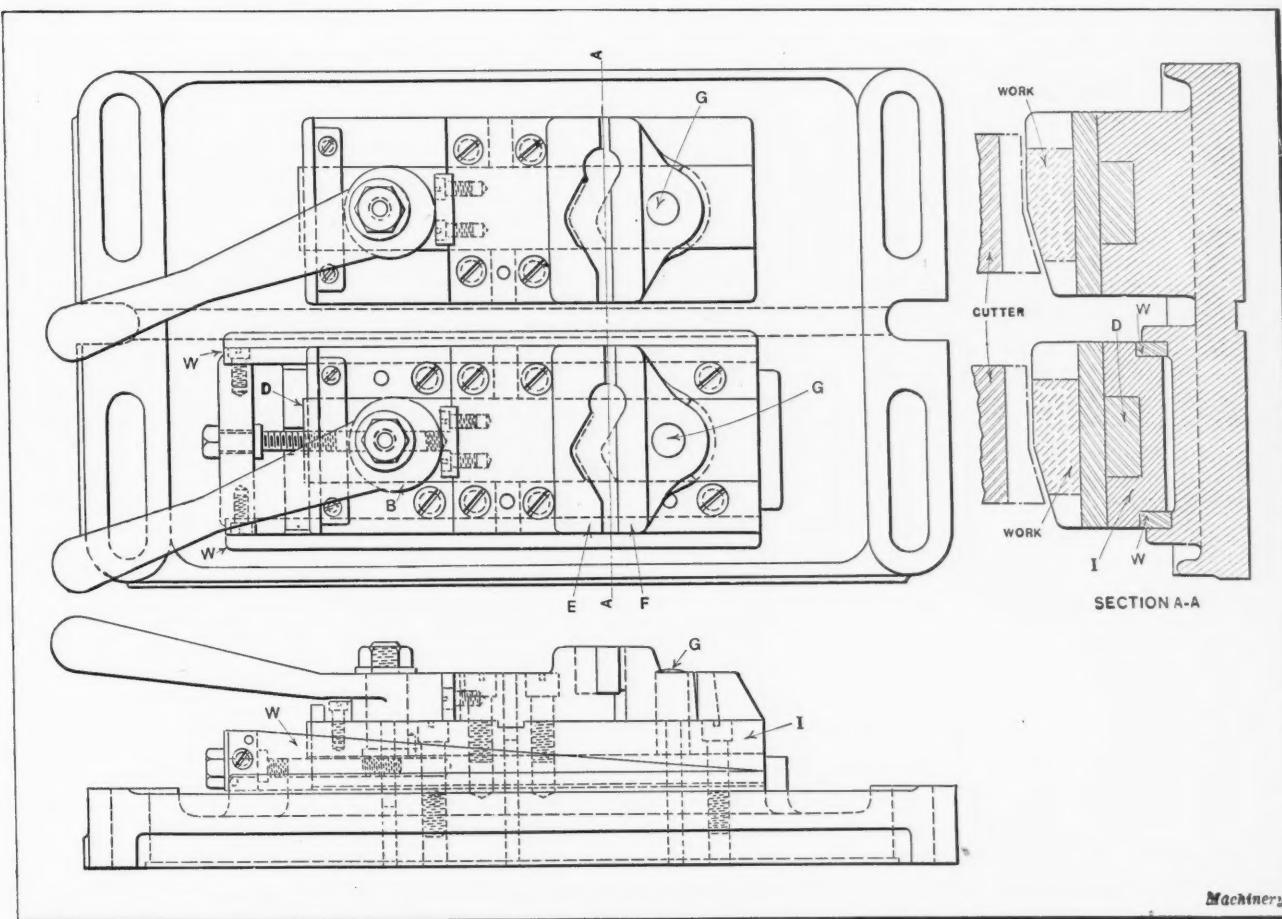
Duplex Milling Fixture with Provision for adjusting the Vertical Position of One Holding Unit
